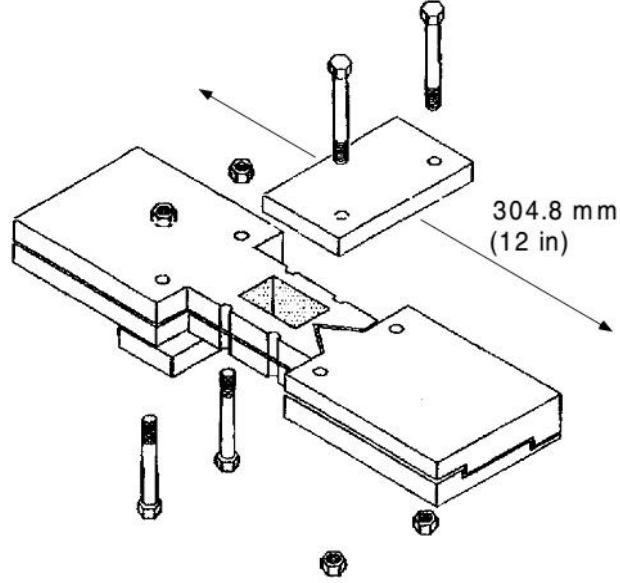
SACMA Test Fixture (ASTM D 6484) [10]
